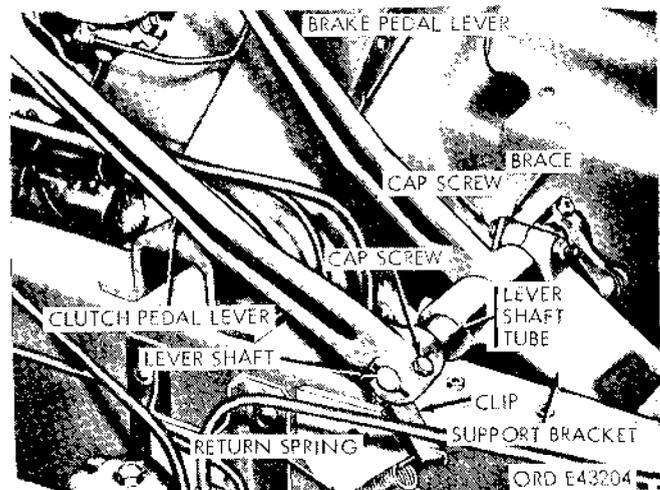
Brake and clutch pedal assembly mounted to vehicle.
